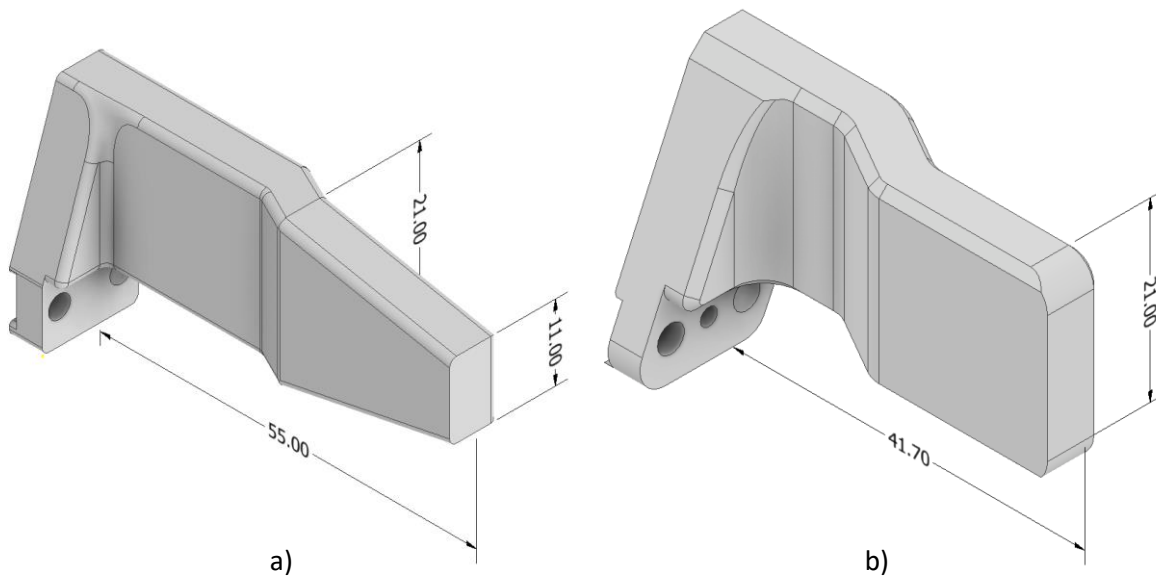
a) 3D Printed Gripper Geometry (mm), b) Stock Gripper Geometry (mm)
